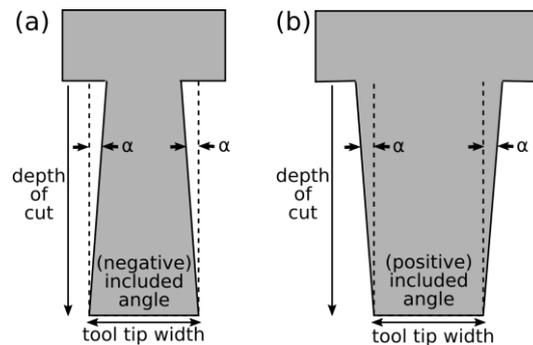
The diamond tool design, showing a tool with (a) a negative back clearance angle α , and (b) a positive back clearance angle α .
